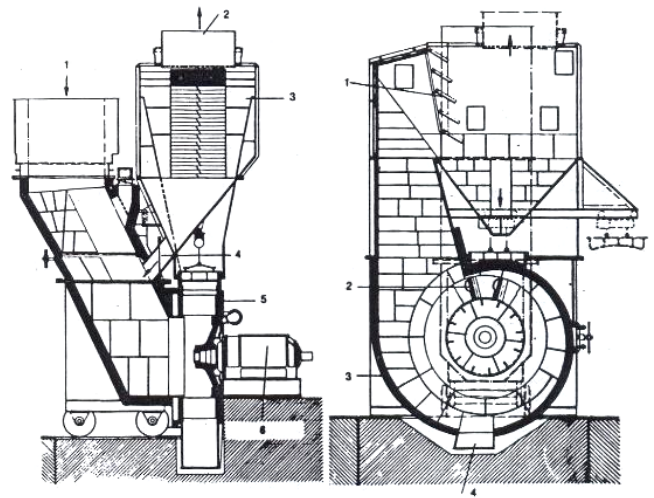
Beater wheel mill concept; 1-coal and recalculation gasses; 2-mixture; 3-separation; 4-return of larger coal particles; 5-beater wheel; 6-double bearing; (1)-regulation flap; (2)-beater wheel; (3)-housing armor; (4)-metal bins canal.
